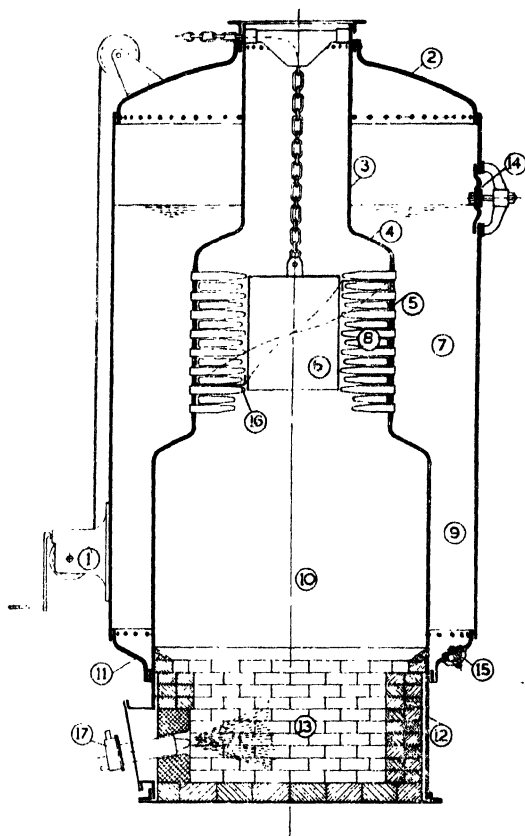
THIMBLE-TUBE OIL-FIRED BOILER
